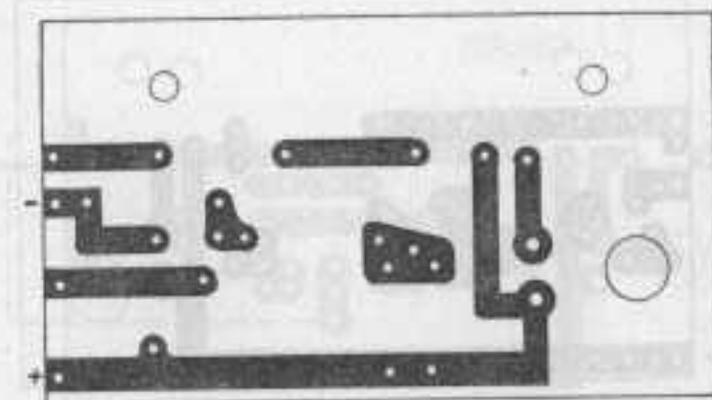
PRINTED CIRCUIT PANEL FOR DESIGN NO. 5 CIRCUIT.
